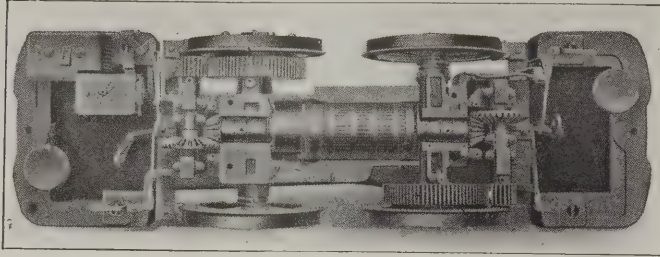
Single Motor Drive. Motor Mounted Longitudinally and Driving Both Axes Through Bevel and Spur Gears
